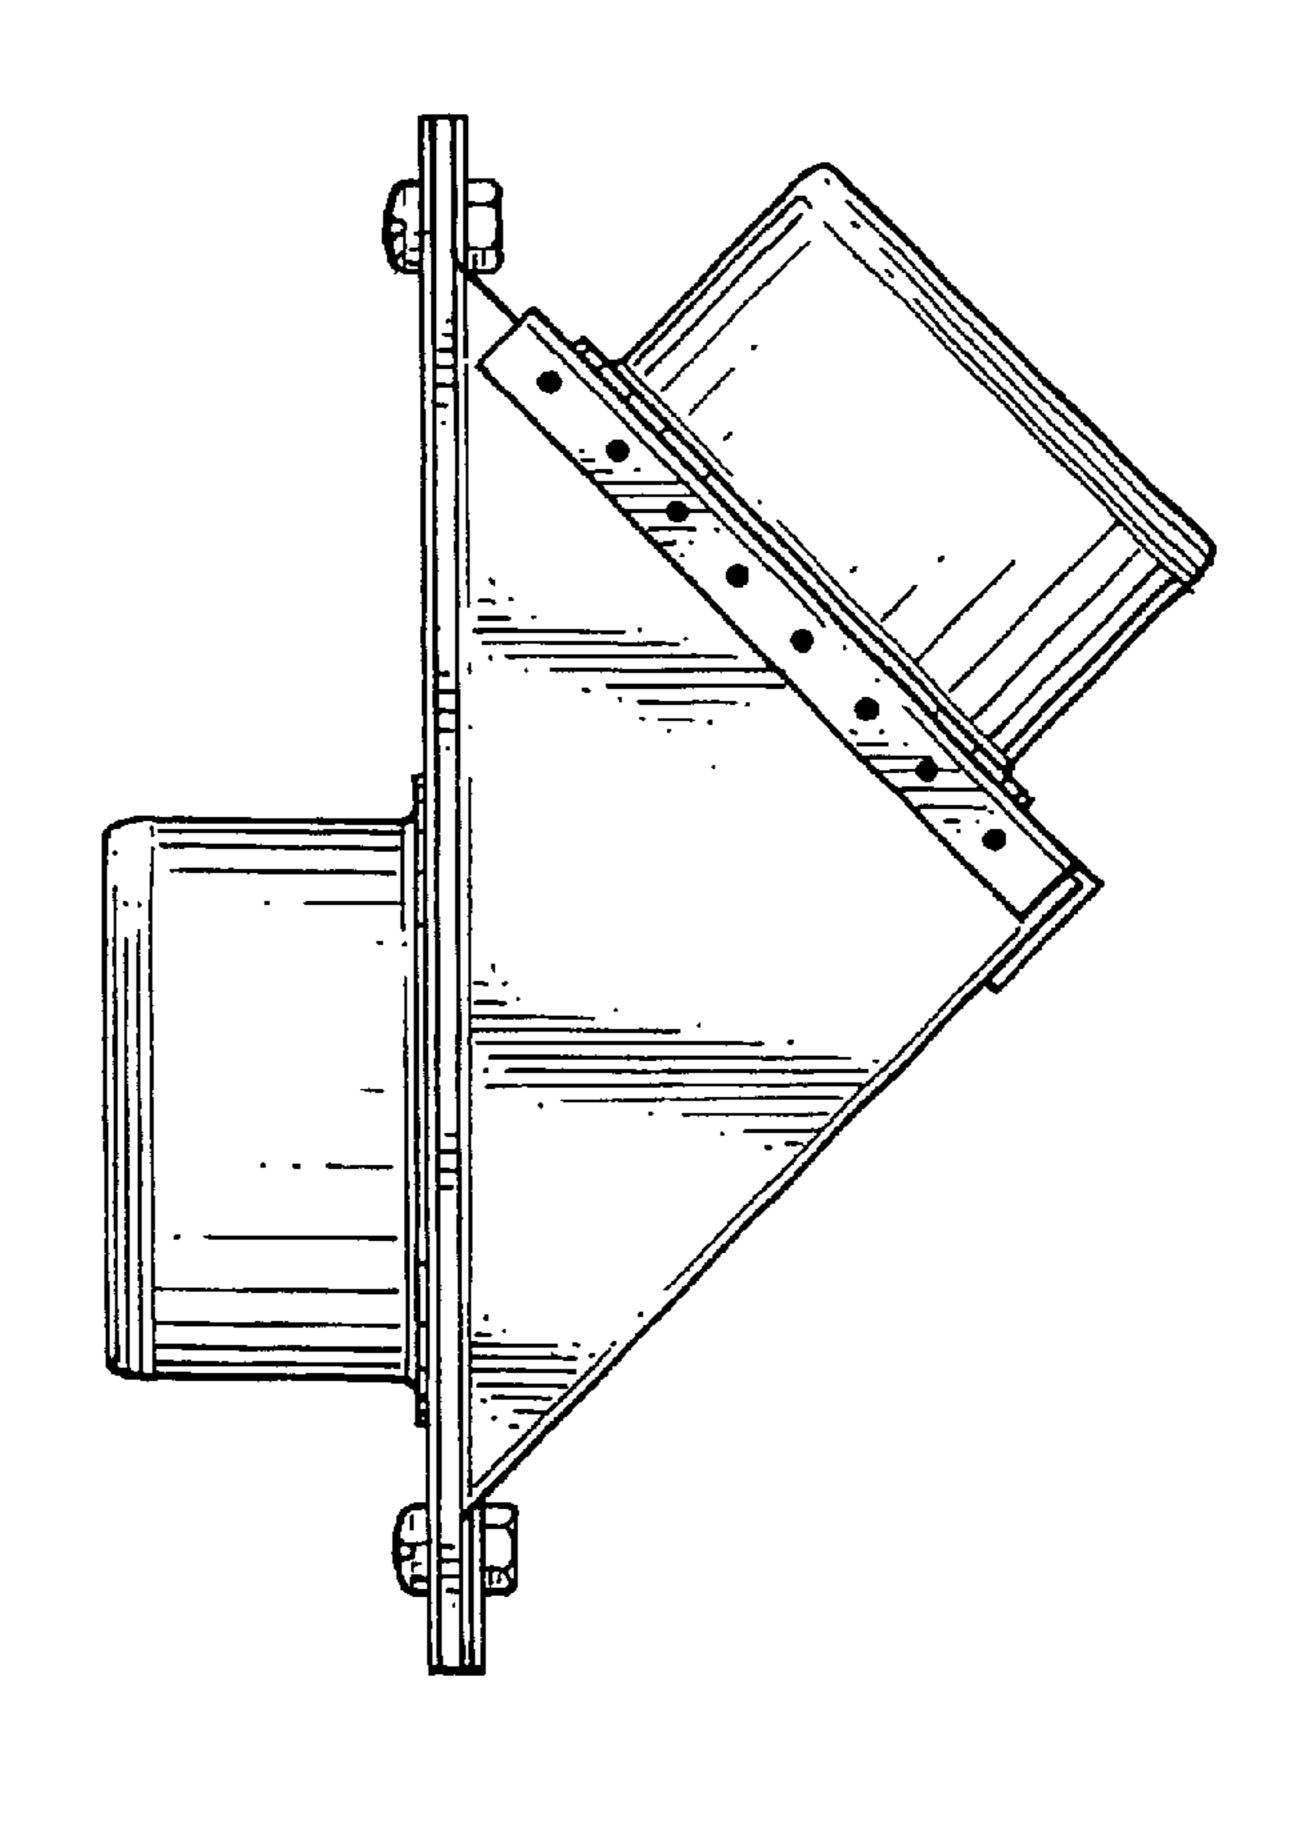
is a right side elevational view of the embodiment of FIG. 1;
